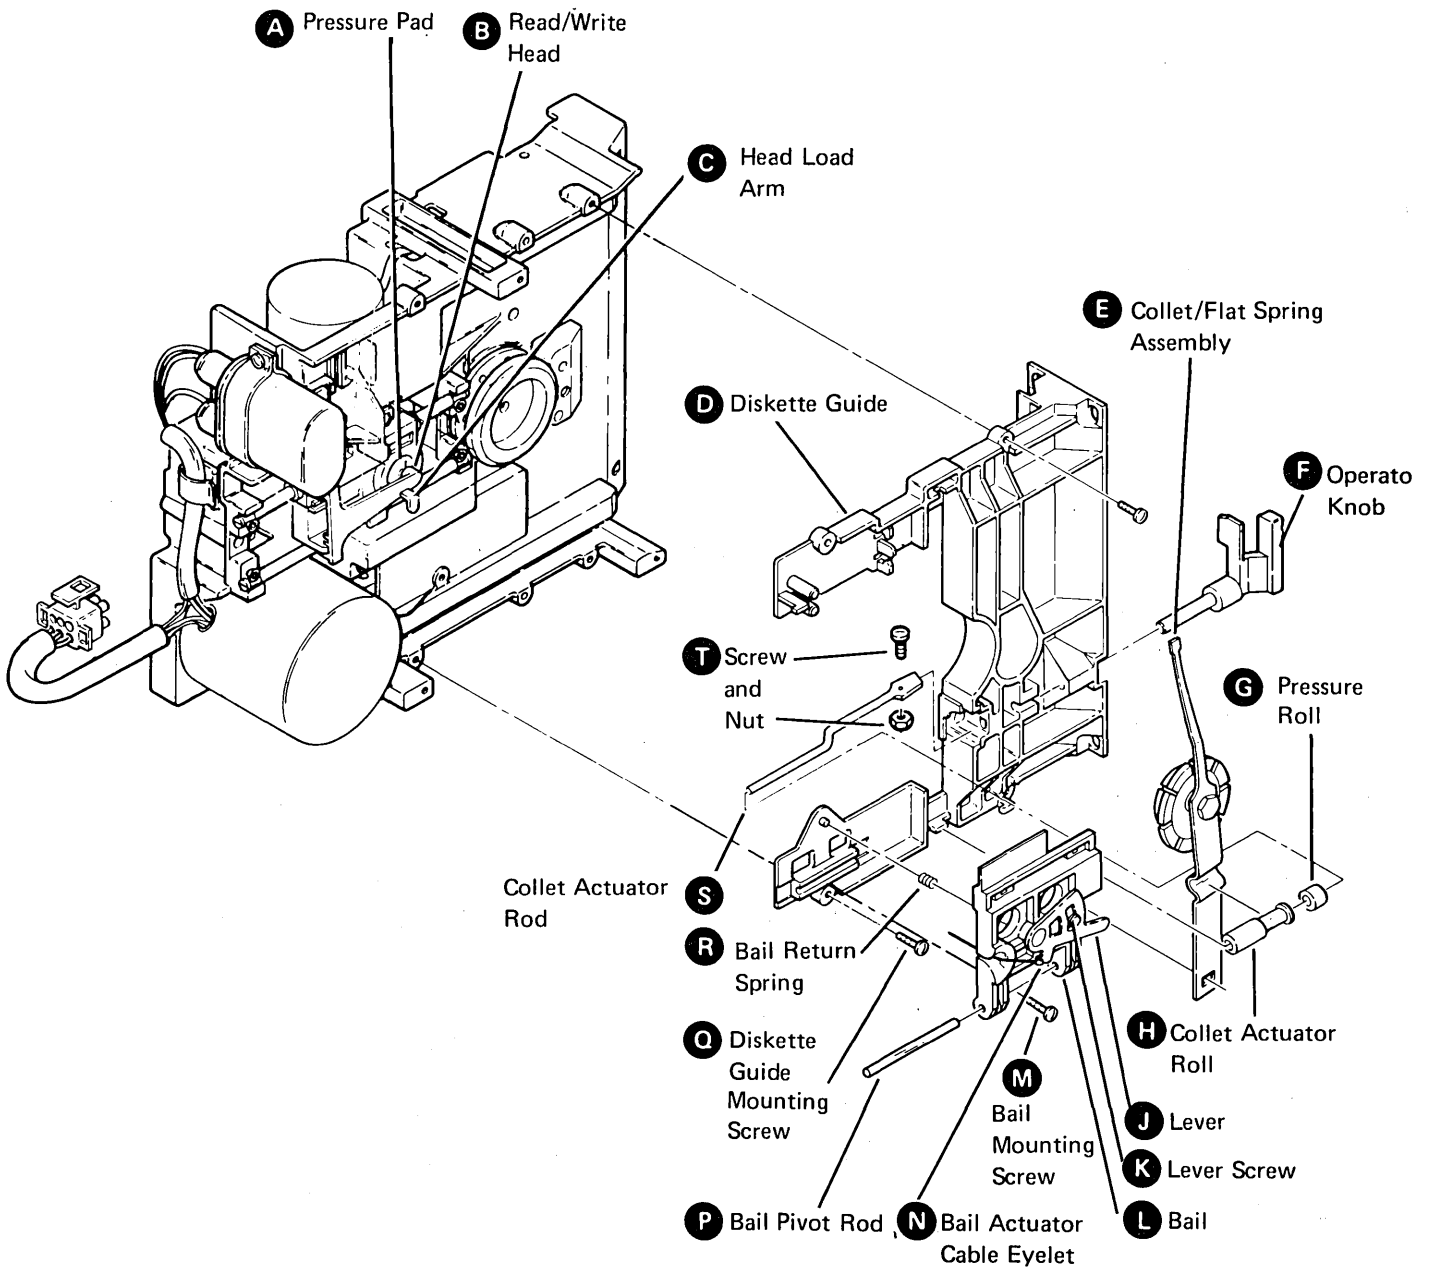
(Part 1 of 2). Collet/Flat Spring Removal
